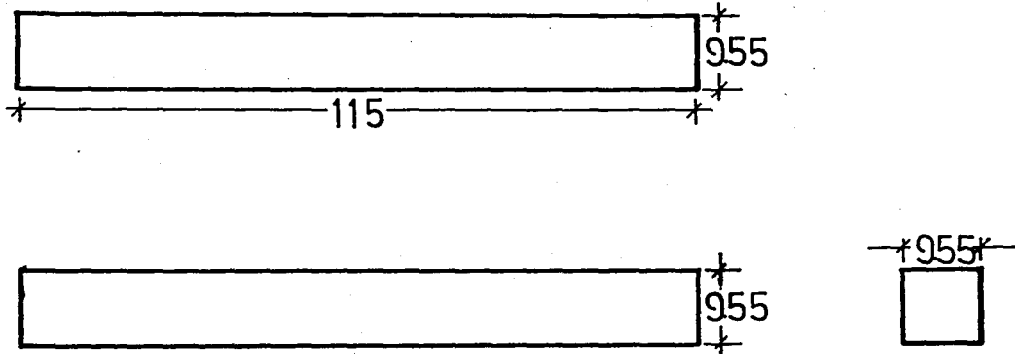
TPB specimen used for bending tests (in mm)
